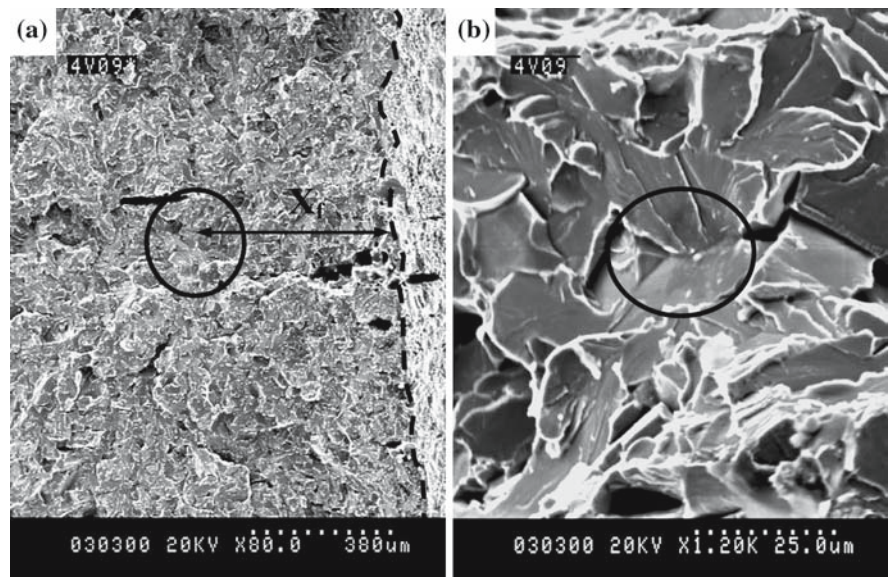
Typical fracture surface showing cleavage initiated at a distance X_f ahead of notch root (a) for a 4V specimen at a loading rate of $V = 500$ mm/min, (b) close look
